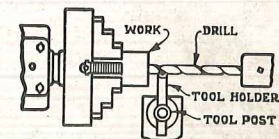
Using Tool Holder to Steady Point When Starting to Drill Hole
